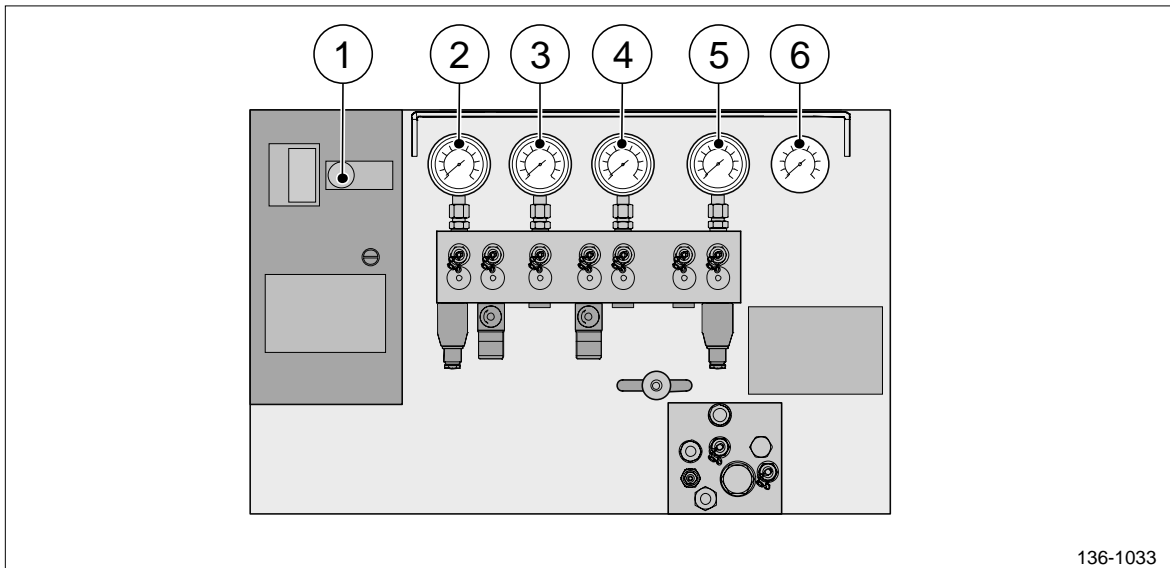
Oil pressure gauges located on the hydraulic power pack control panel.
